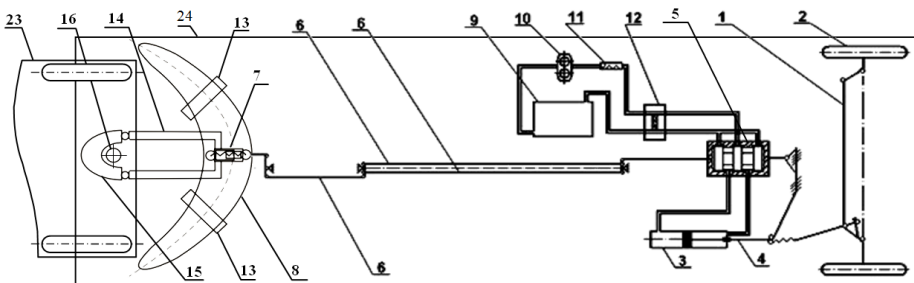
Scheme of semi-trailer control system: 1 - trailer steering trapezoid; 2 - steerable wheels; 3 - executive cylinder; 4 - rod; 5 - hydraulic spool valve; 6 - rod; 7 - setting device; 8 - regulating profile of variable curvature and cross-section; 9 - oil tank; 10 - hydraulic pump; 11, 12 - control devices.
